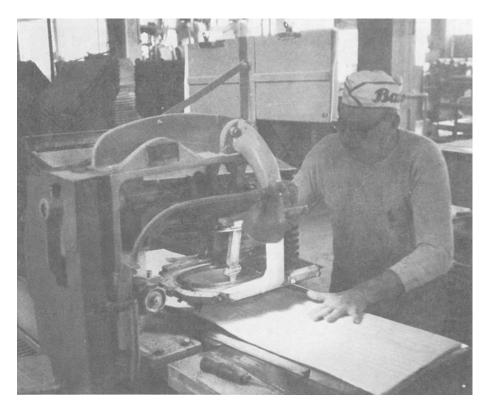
A "slab" of calendered outsole material is manually ted beneath the cutting head of the Wellman Outsole Cutting machine.
